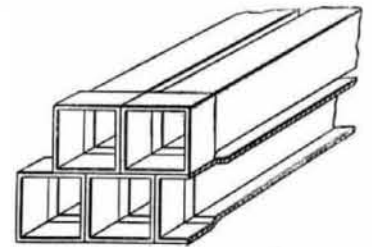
RADIATOR FORMED OF EXPANDED TUBES.
